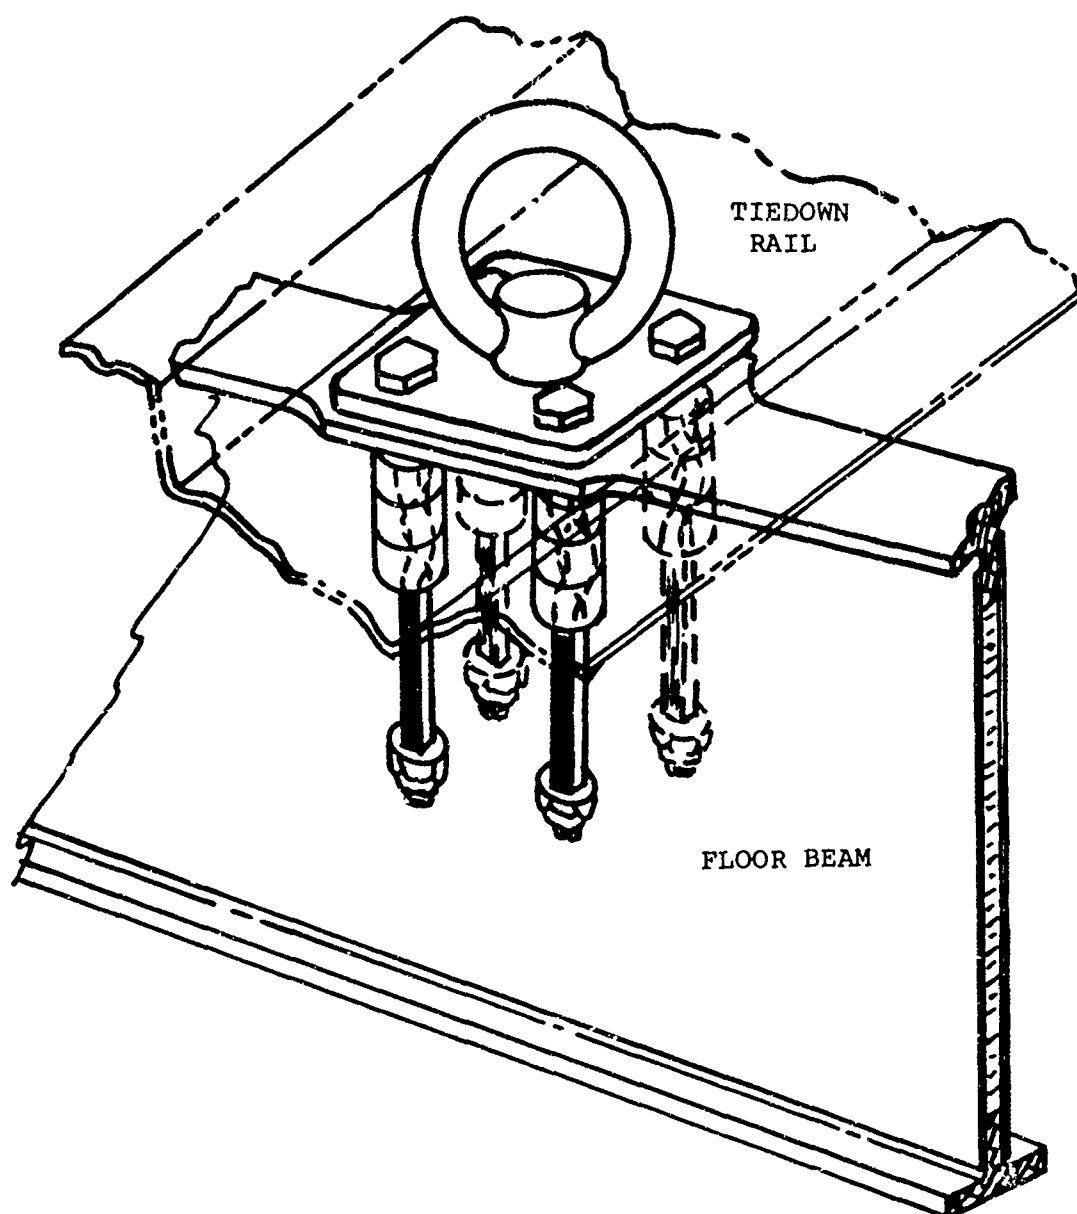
Type Load Limiter Retrofit to Existing Floor Tiedown Fittings (ARDE).
